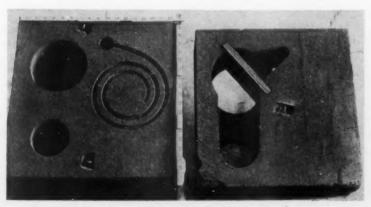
MOLD FOR FLUIDITY SPIRAL.
